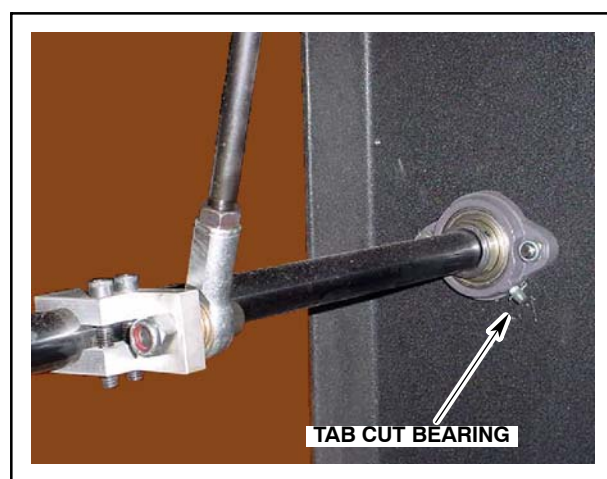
Grease Rear Bearings in Tab Cut Section
